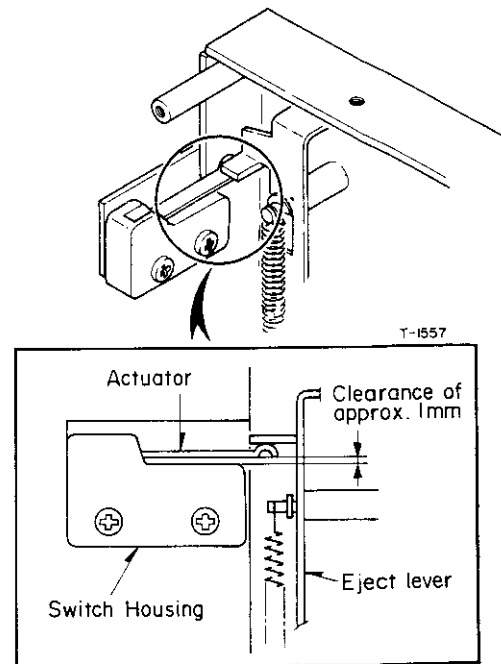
Micro Switch (B) Ass'y Clearance Adjustment
